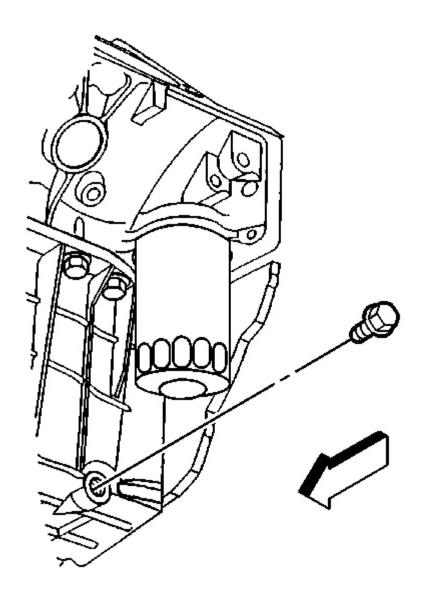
Identifying Oil Drain Plug Courtesy of GENERAL MOTORS CORP.
